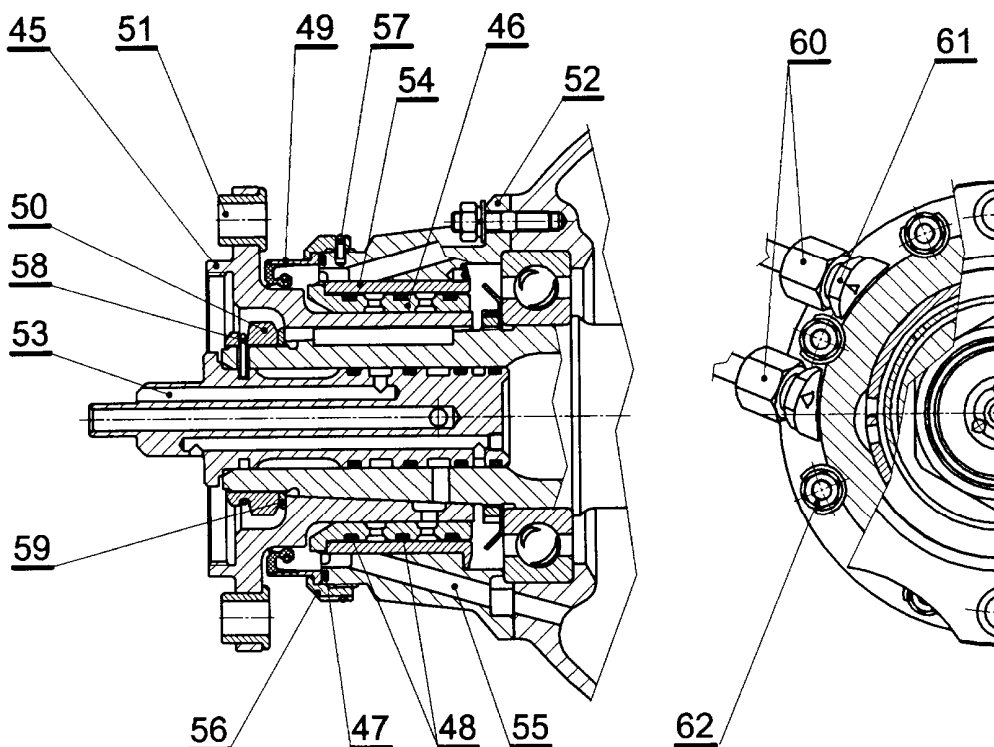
Pressure oil distributor LUN 7902 longitudinal section
